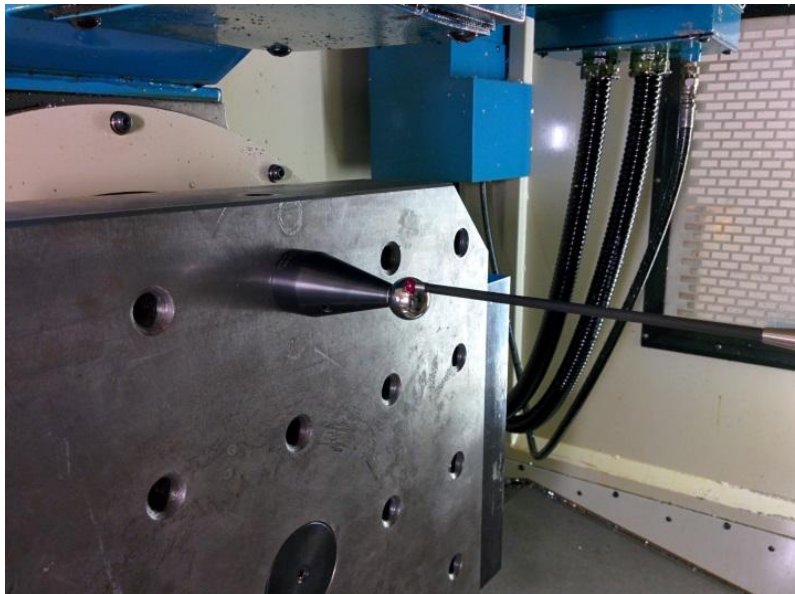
The precision sphere probing on the wCBXfZY(C1)t machine tool
